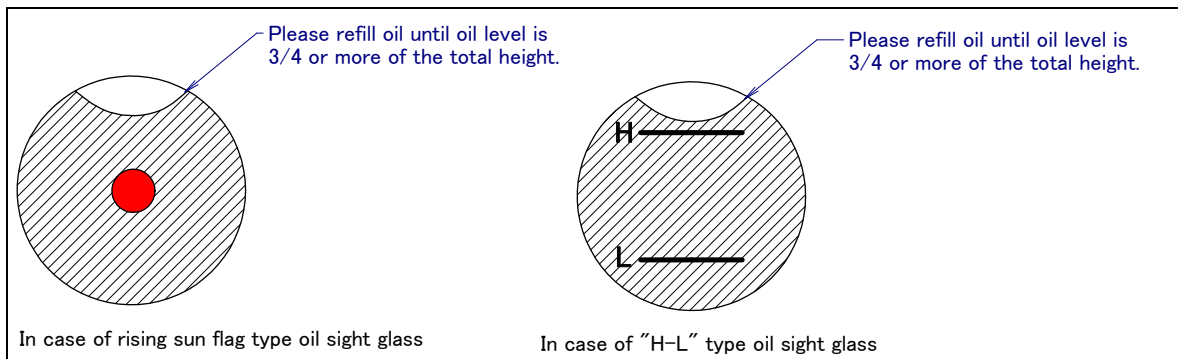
(d) Standard of oil sight glass (supplying oil J5/J6-axis gearbox)
